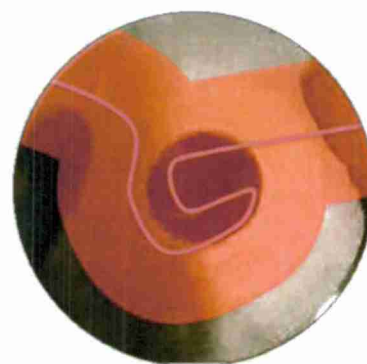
Example of a casting with the search pattern and the UFOV highlighted.
